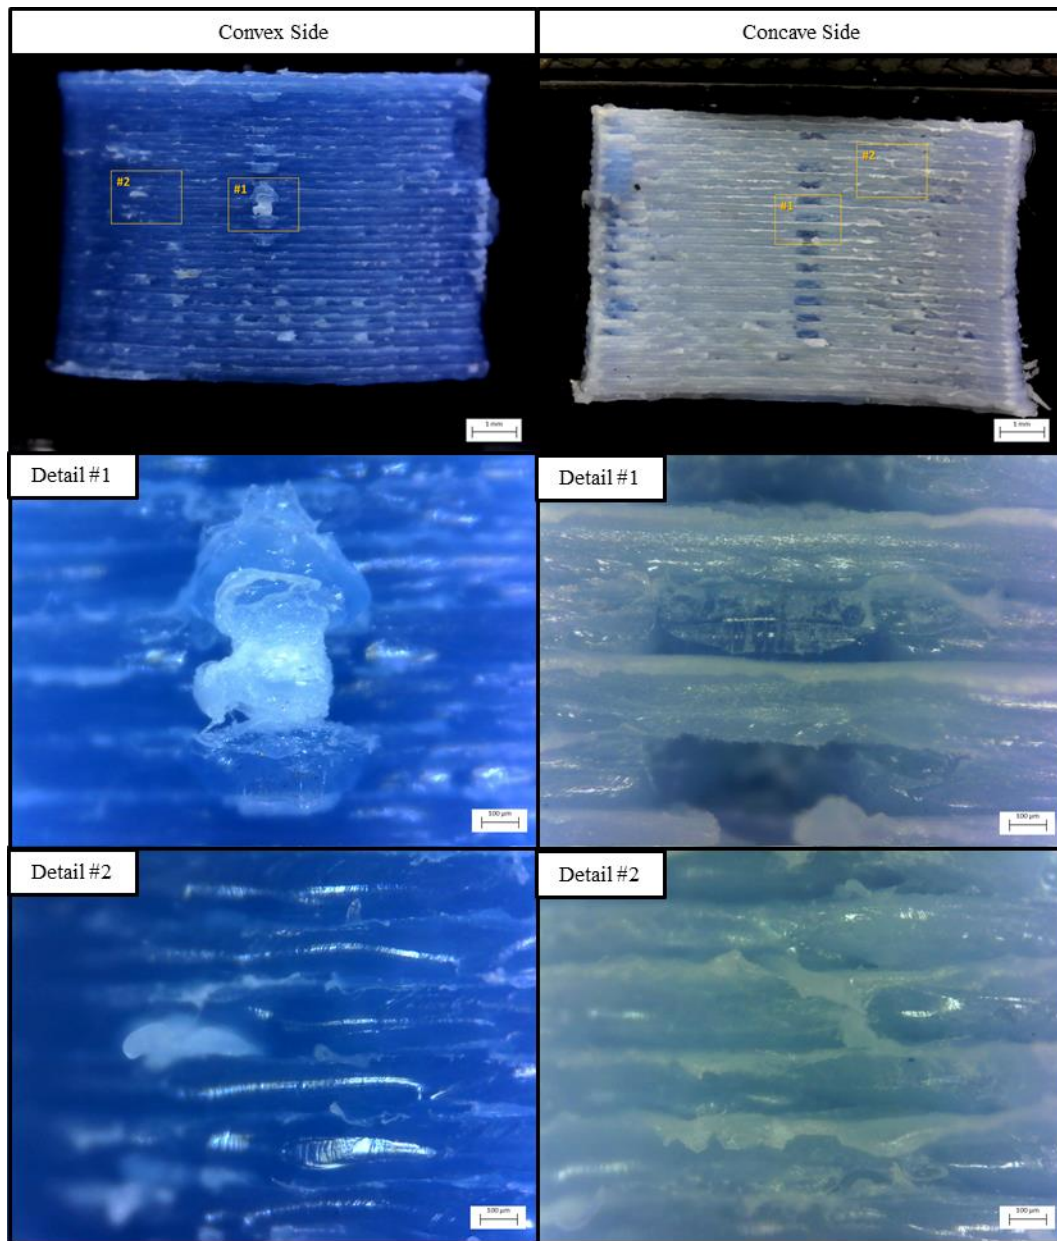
Fracture surfaces of IBS specimen 1 for interface between compositions 100% and 50%.
